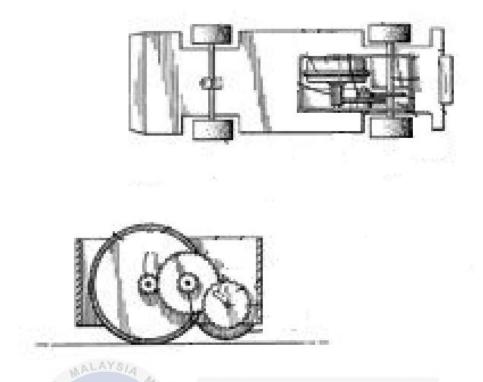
Top and side view of flywheel mechanism (Bender, Glen, Buratto, & Evans, 1990).
